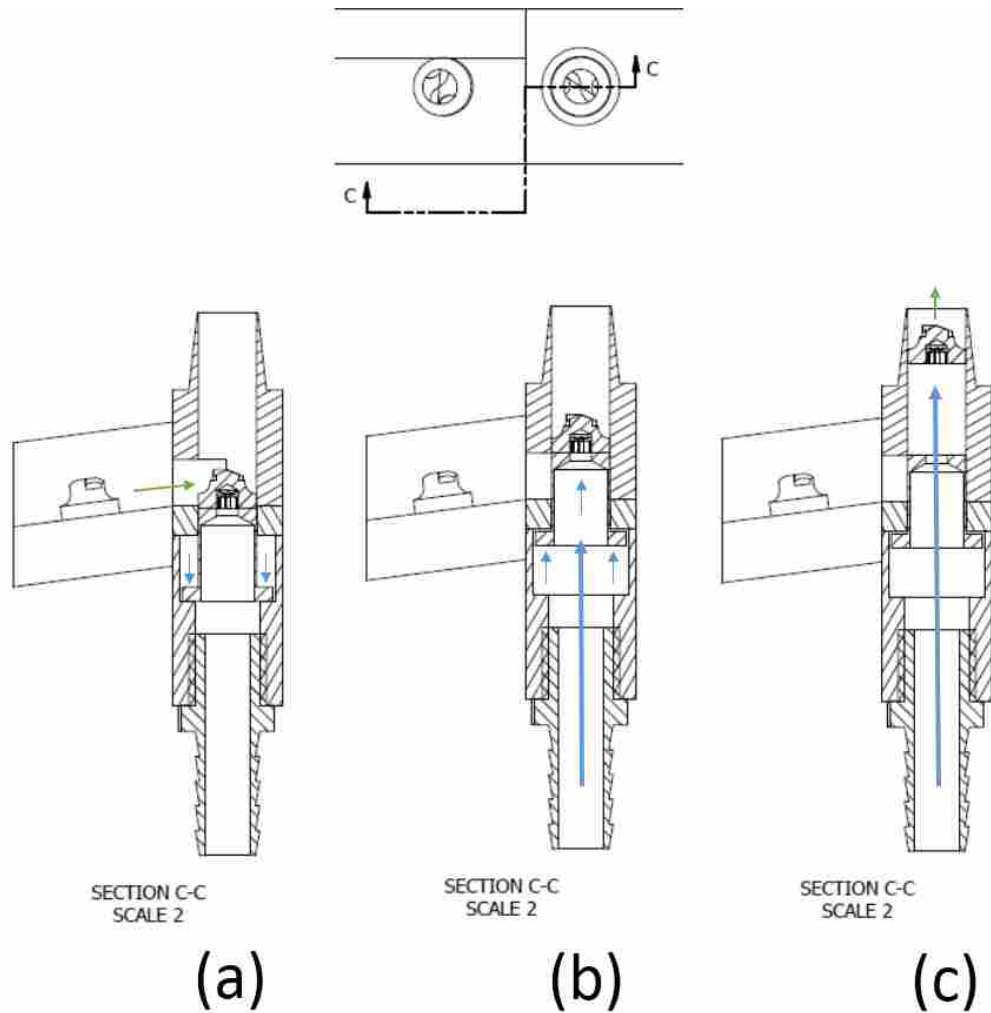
Sectioned View of the Pneumatic Bit Loading Mechanism
